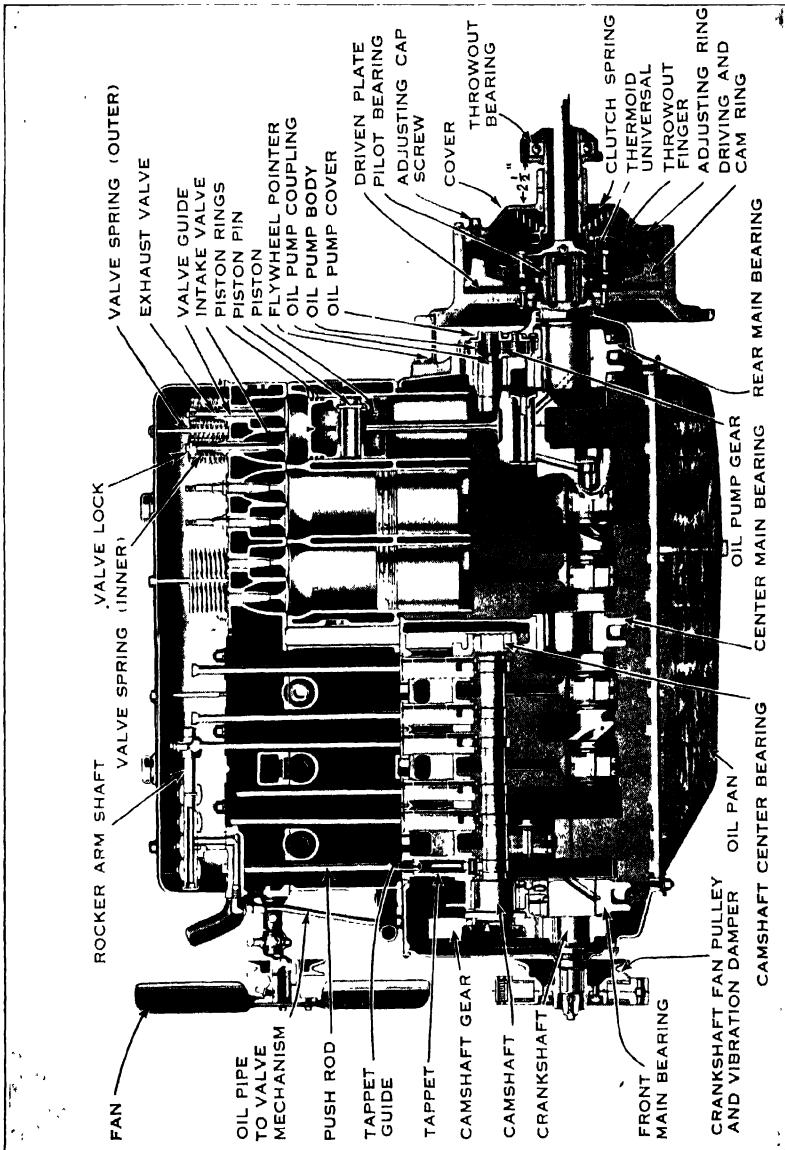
Sectional View of Engine and Clutch. (Marmon.)
